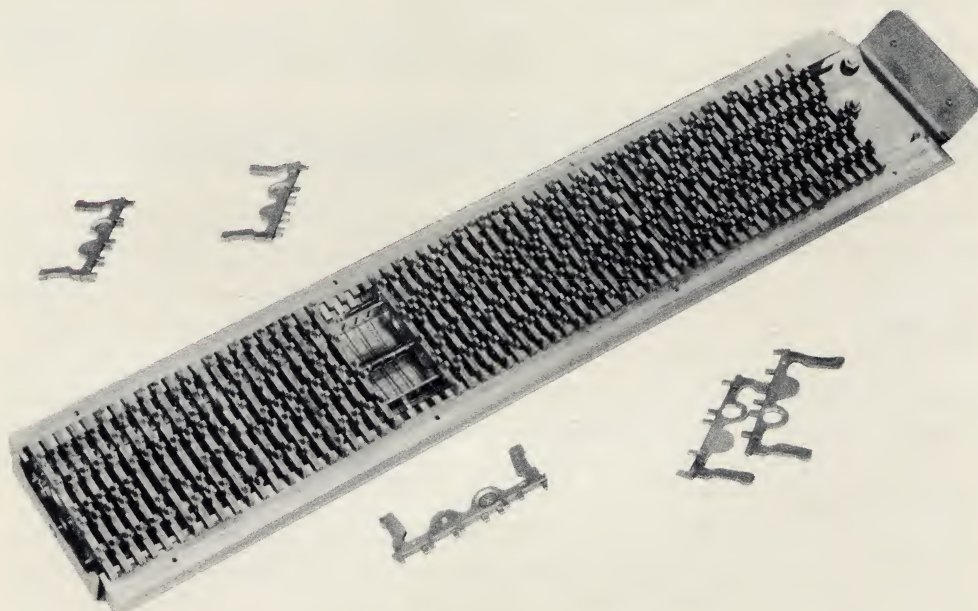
Removable Counting Magazine* used in the Multiface Perforator.
